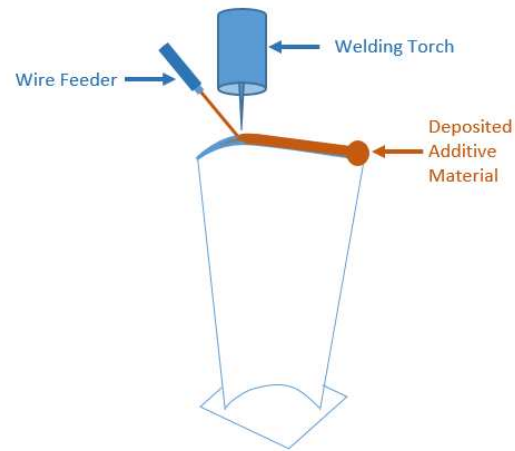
Blade tip-repair using GTAW-based additive manufacturing. The additive material is fed on the workpiece in the form of a wire.
